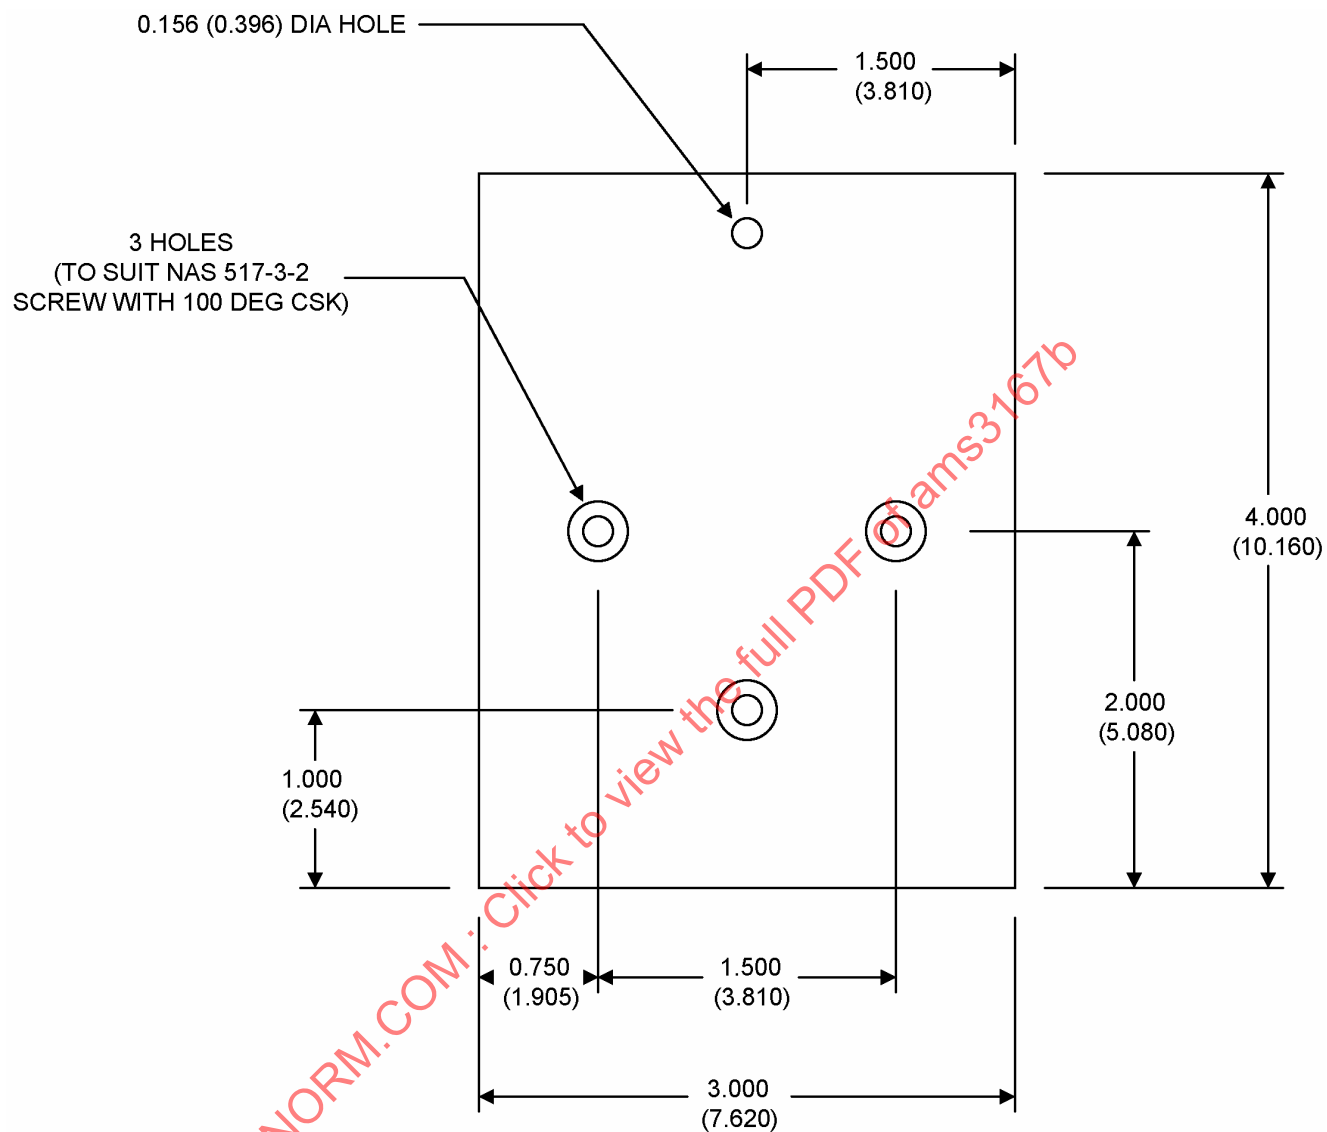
Dimensions of Dissimilar Metal Test Panels
